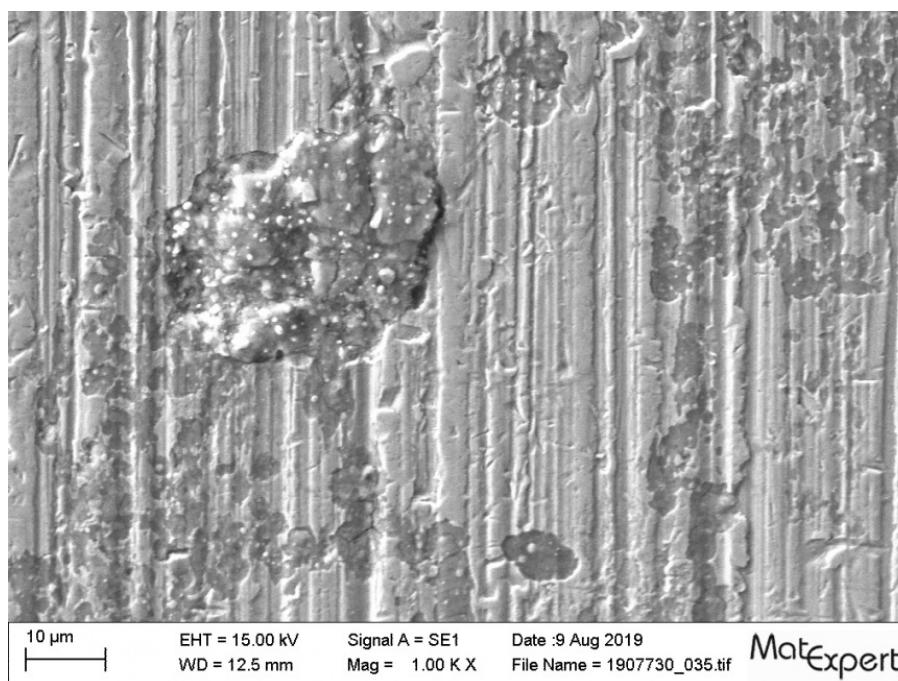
Bearing no. 3, outer-race bearing track – flat-rolled corrosion and abrasive wear.
